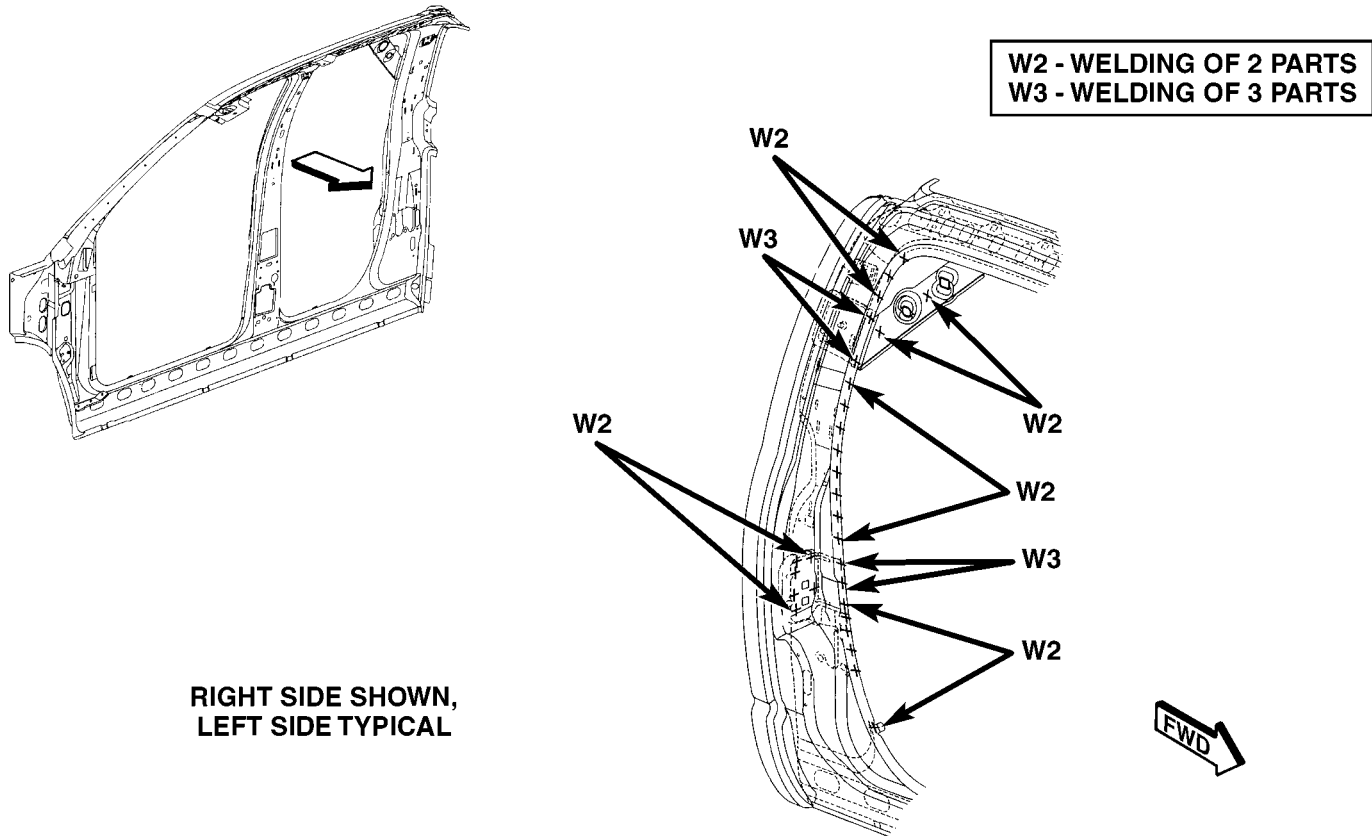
SEAT BELT MOUNTING PLATES - QUAD CAB
